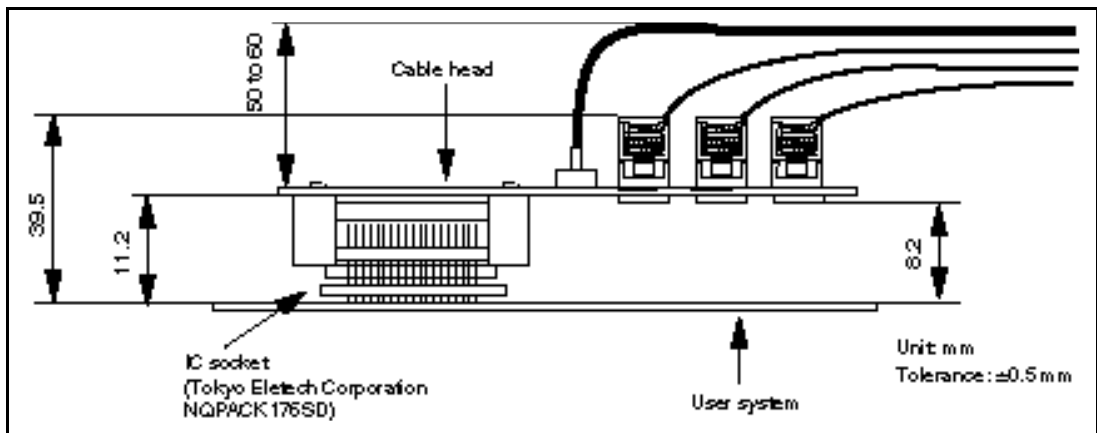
Resulting Dimensions after Connecting User System Interface Cable
